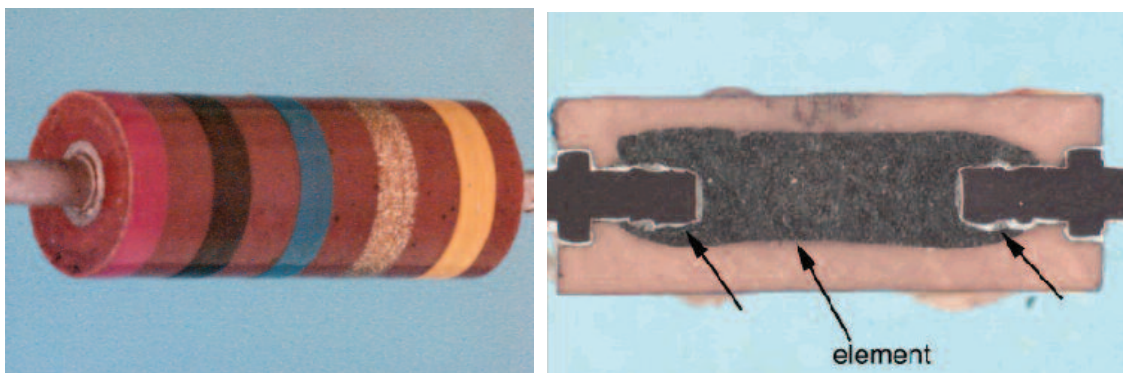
External view (left) and cross-section view (right) of a typical composition resistor.
